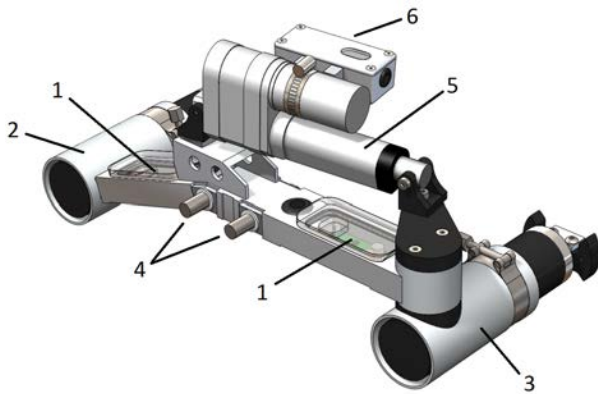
Overview of front rockers sub-assembly (left rocker shown, right rocker is an exact mirror) (1) Drive motor controller PCBs, mounted *inside* the rocker (2) Middle wheel drive motor assembly (3) Front wheel drive motor assembly (4) 4-bar linkage pivot points (5) Steering mode linear actuator (6) Linear actuator motor controller PCB within protective housing
